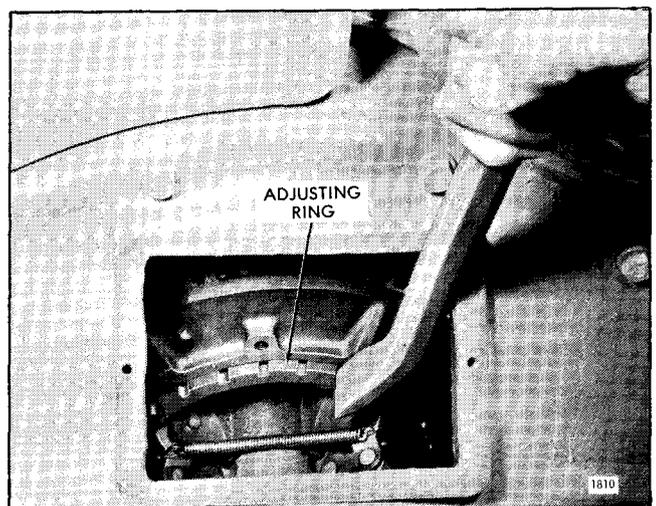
Power Take-Off Showing Typical 8" and 11-1/2" Diameter Clutch Adjustment Ring
